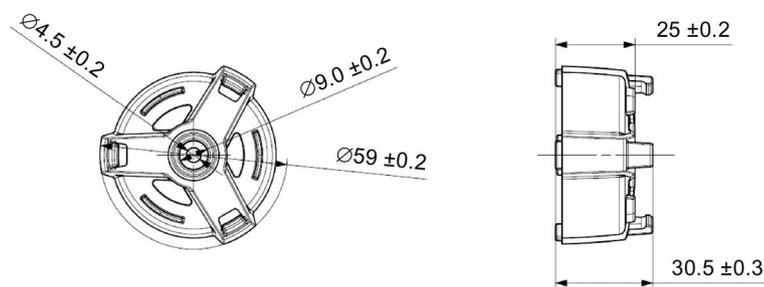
Dimension drawing of spacer 6GT2690-0AL00
